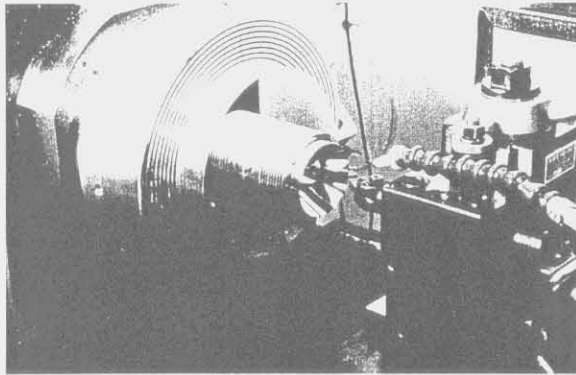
Vacuum chuck for workpiece holding (Photo from Taylor Hobson Pneumo Co.)
